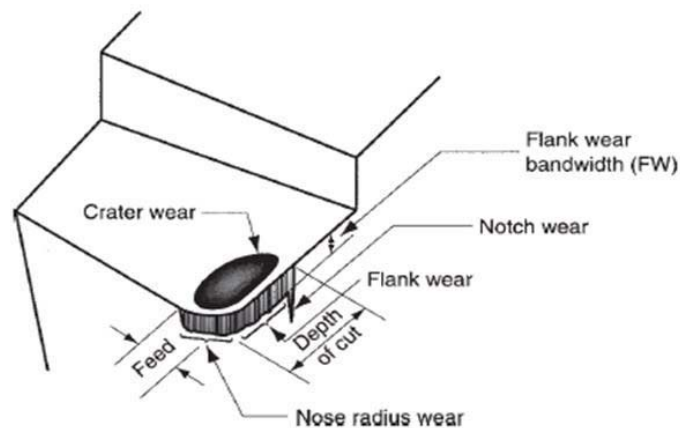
Flank and Crater Wear of Cutting Tools [7]
